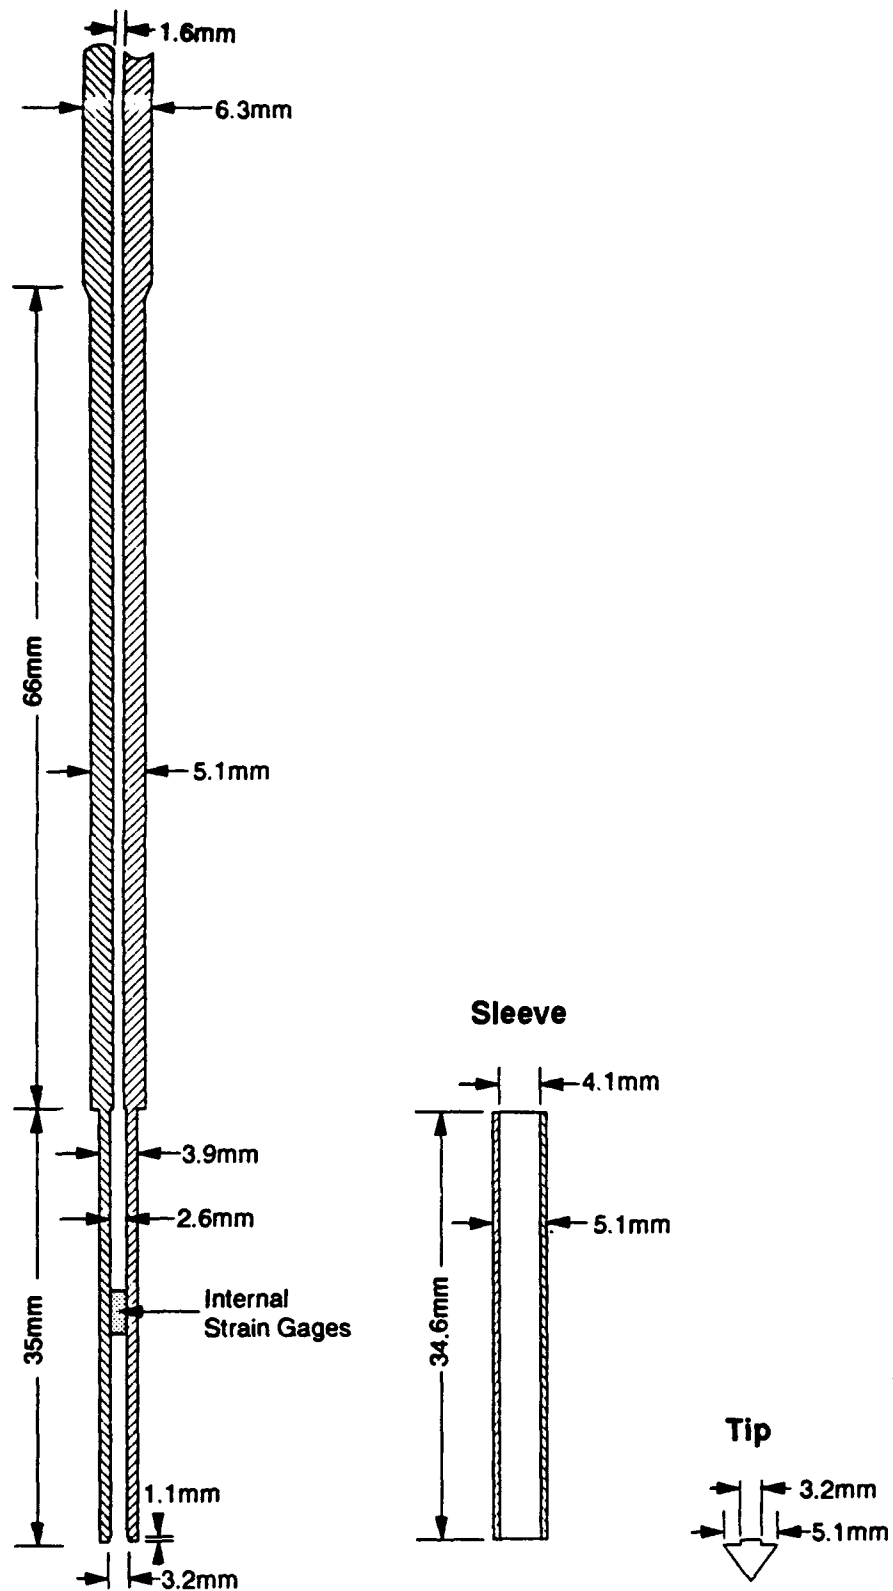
Disassembled View of the 5.1-mm Cone Penetrometer used in Laboratory Testing.
